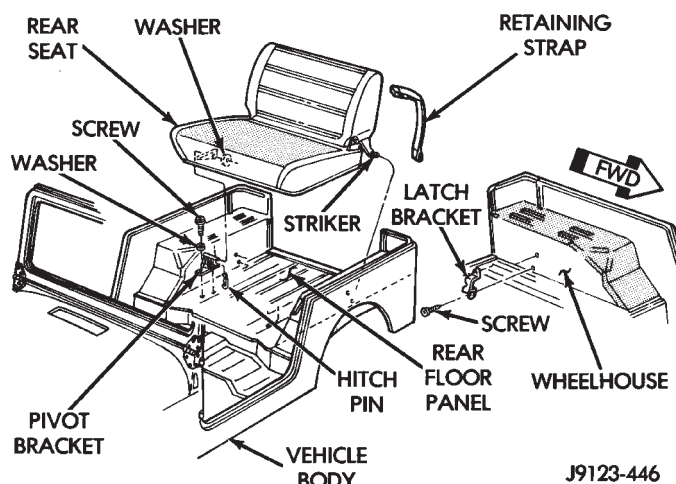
Pivoting/Folding, Bench-Type Rear Seat
